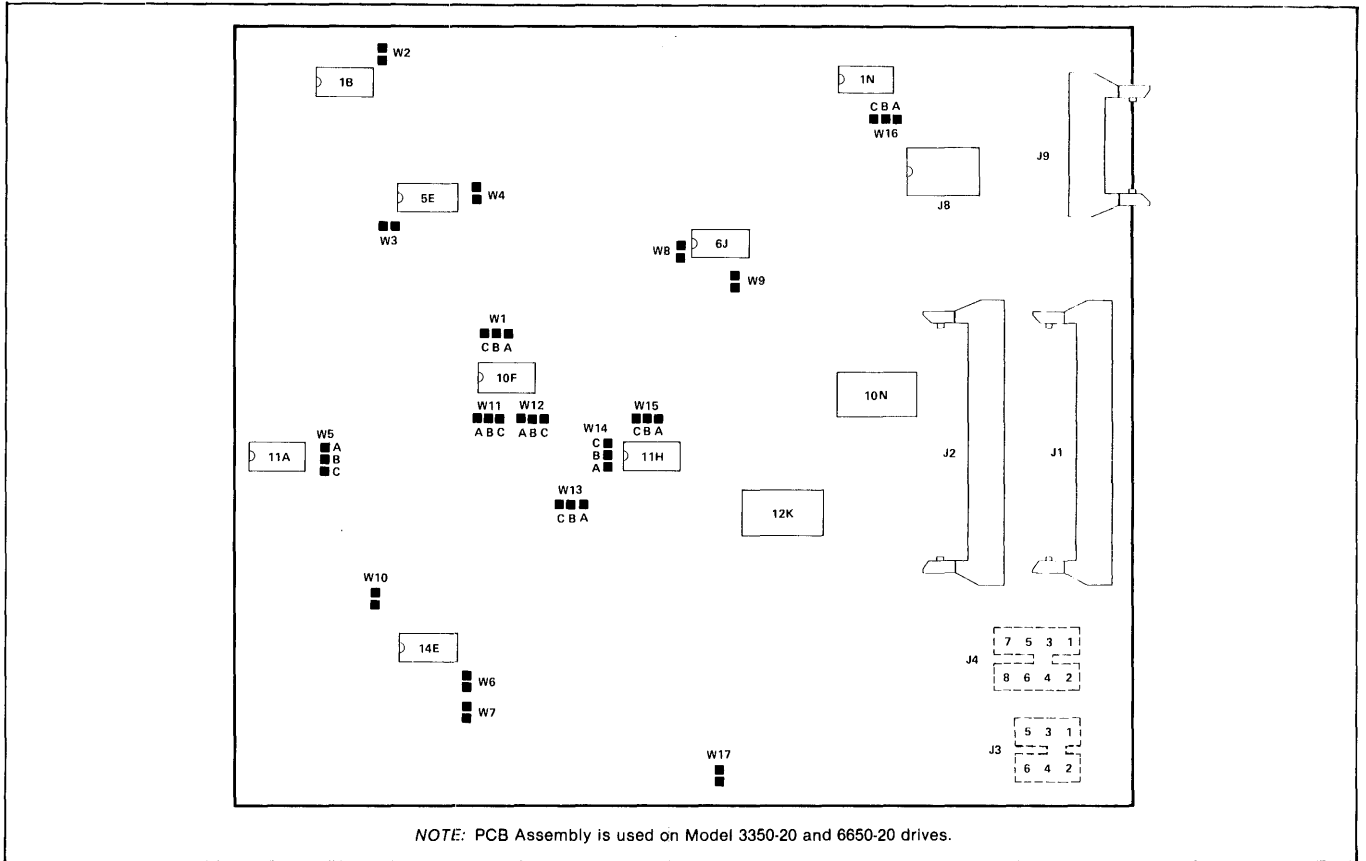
DIP Switch and Jumper Locations for PCB Assembly 200148-01/02
